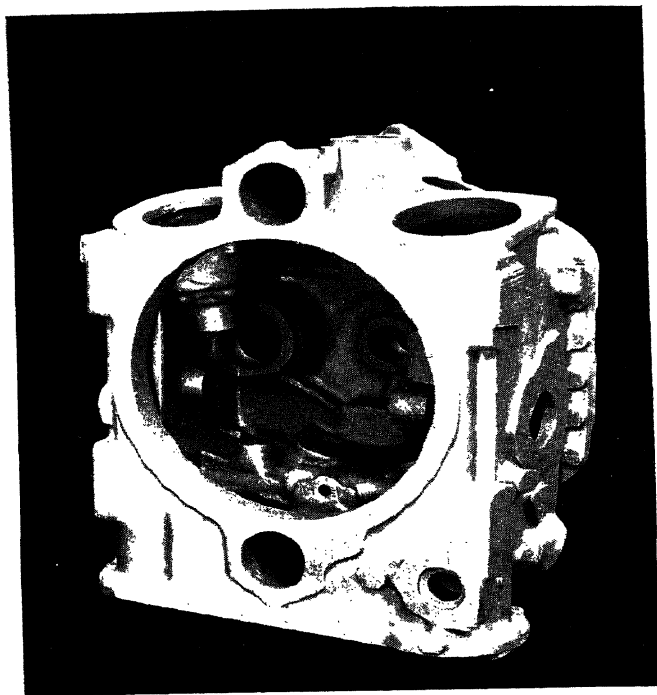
Aircraft engine timing gear case cast in magnesium alloy. (*Magnesium Castings Product Co.*)
